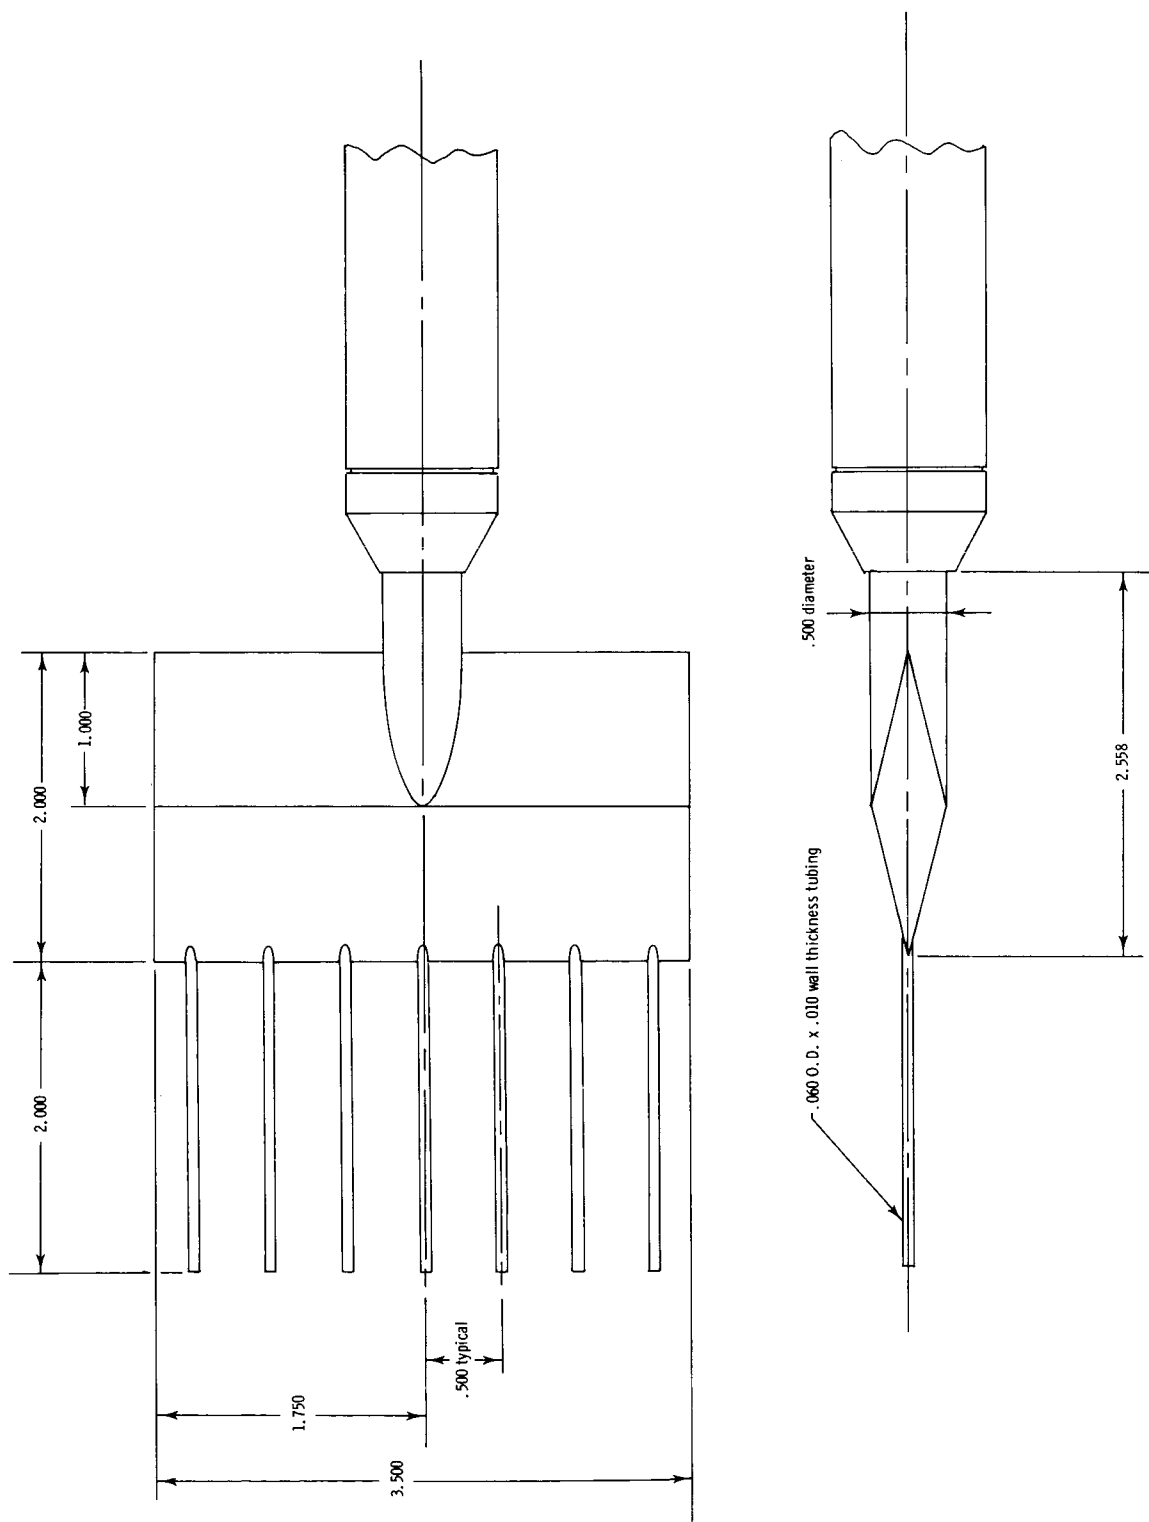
Details of the nozzle. Linear dimensions are in inches.
